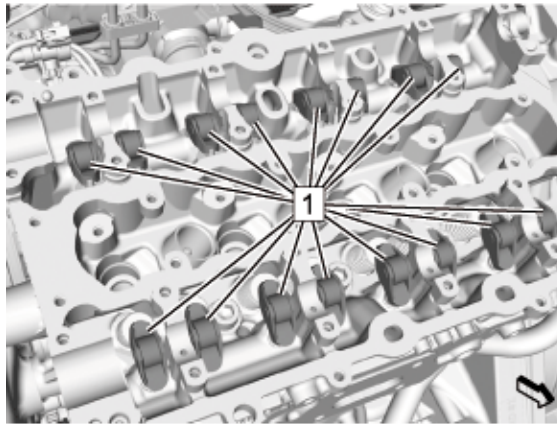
Hydraulic Valve Lash Adjuster Arms
